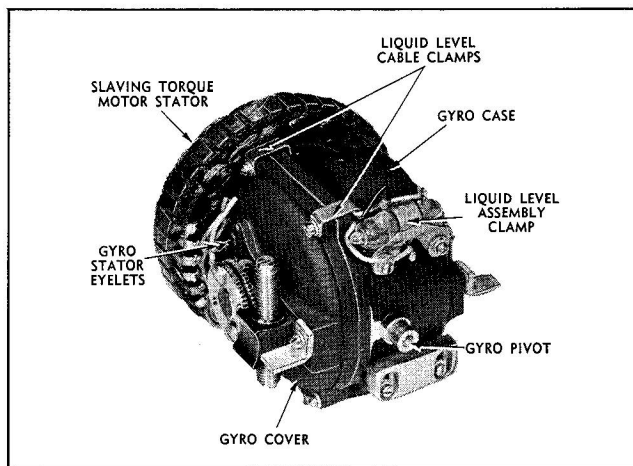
Gyro and Slaving Torque Motor Assembly
